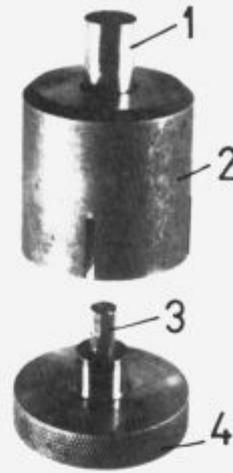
Container for plastometric tests by compression: 1 - upper die; 2 - body; 3 - specimen; 4 - lower die.
